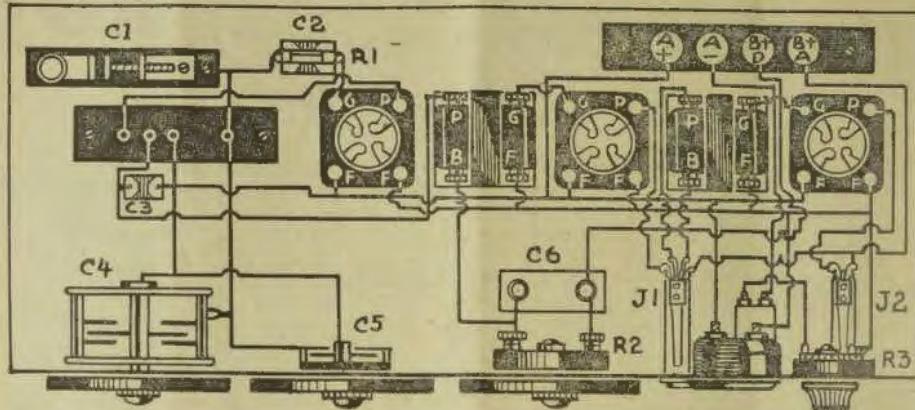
Method of assembly of open model. Draw in order, Fig. 1 and 4.
